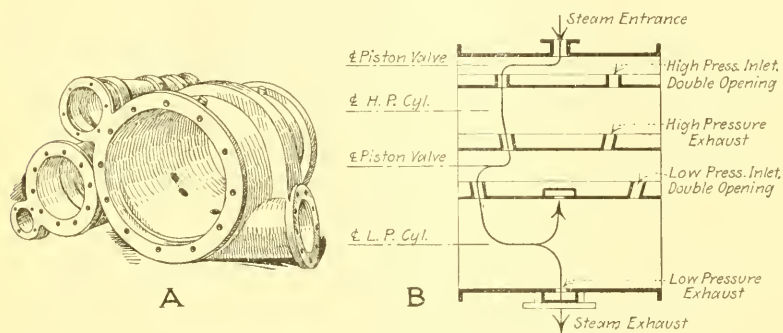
R. WOLF SUPERHEATED STEAM LOCOMOBILE
